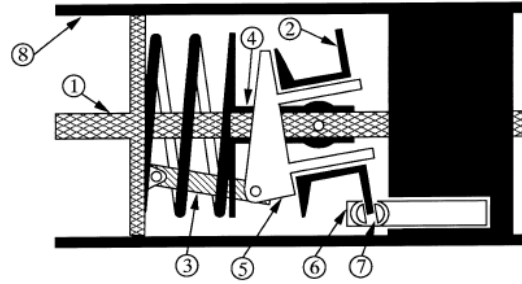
2D picture of the compressor: 1. the shaft; 2. the wobble plate; 3. the fishplate; 4. the spring handle; 5. the inclined plate; 6. one of seven pistons; 7. seven ball bearings; 8. the ground show as a cylinder around the compressor.
